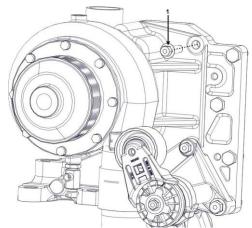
Right-Hand Water Pump/Engine Mount Bolt
